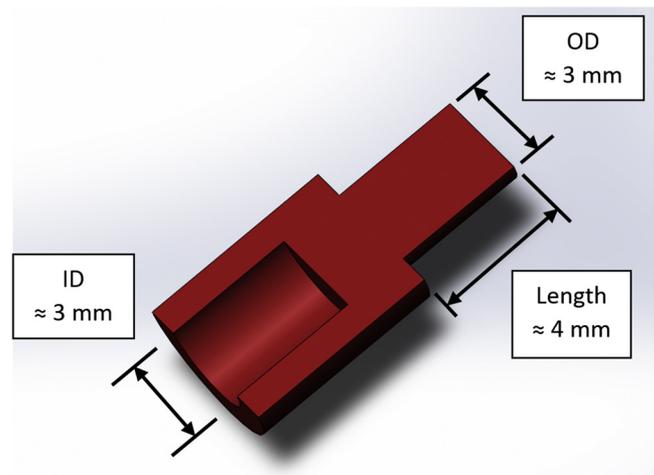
CAD cross-section view of the dimensional artefact showing the measurement distances.
